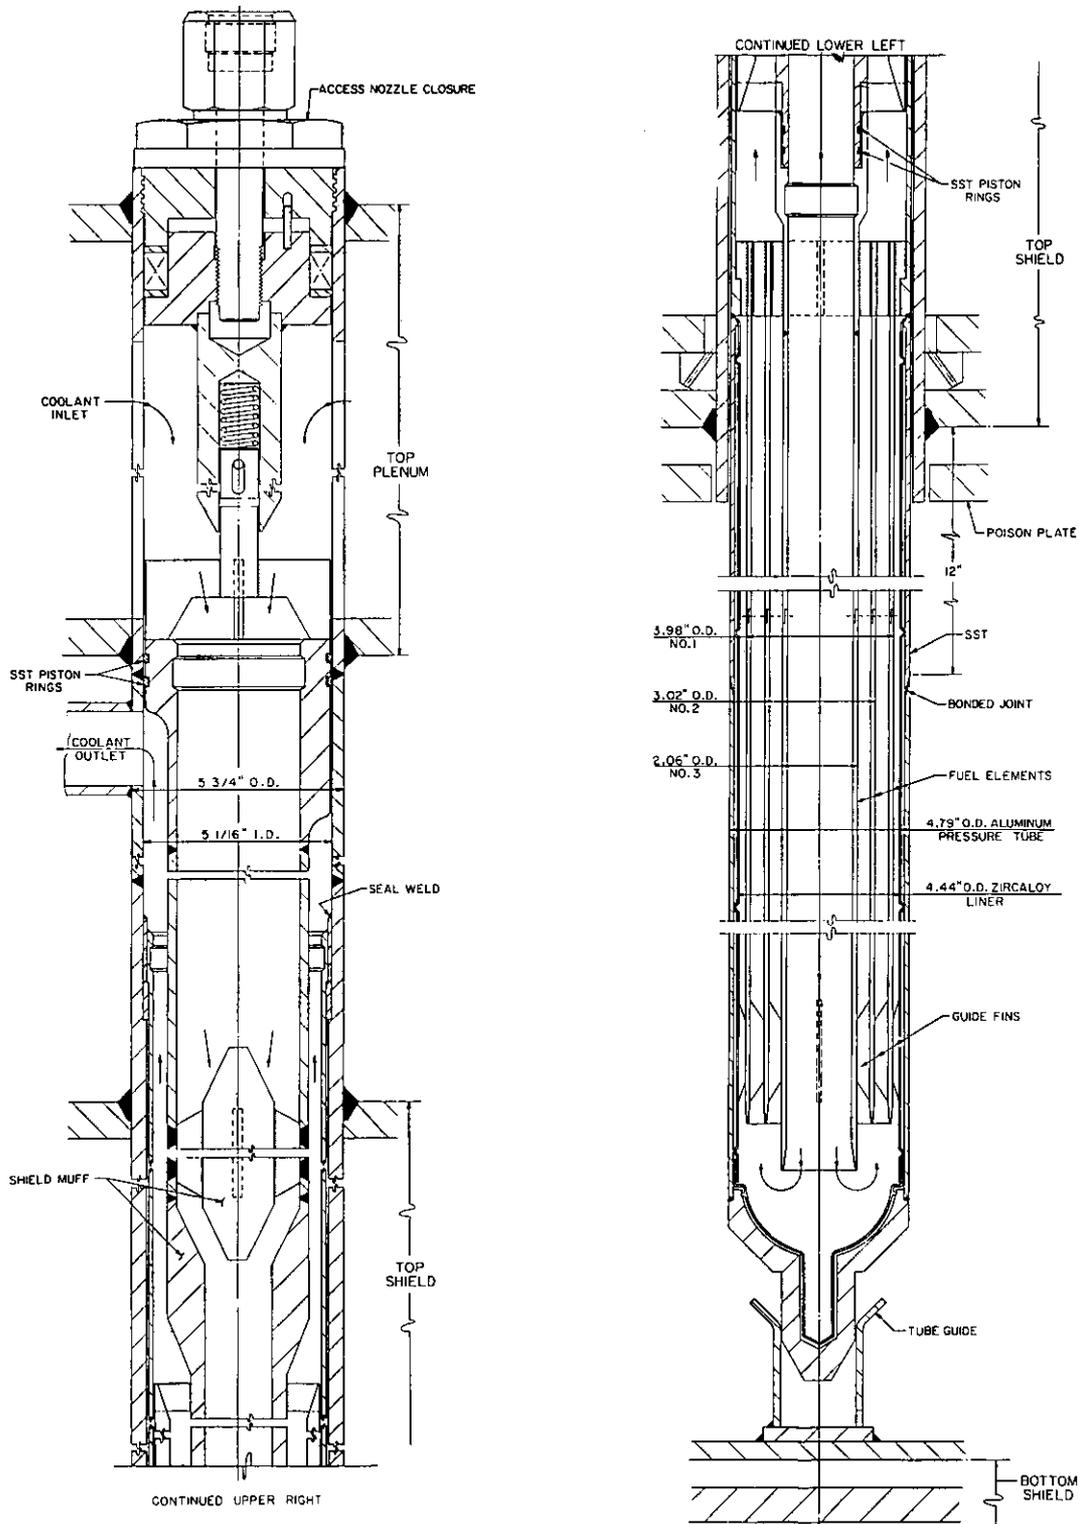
BAYONET PRESSURE TUBE ASSEMBLY FOR BOILING D₂O REACTOR
